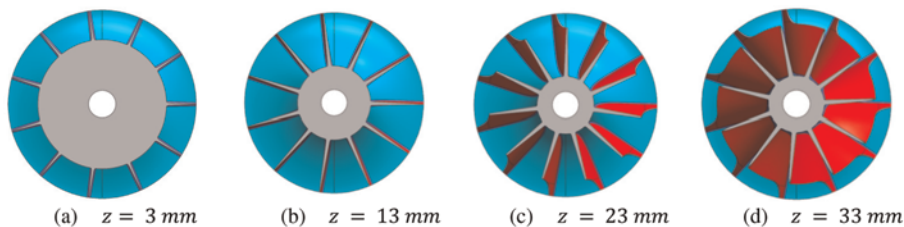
Cross section views of a rotor wheel showing the radial blade fibres.
